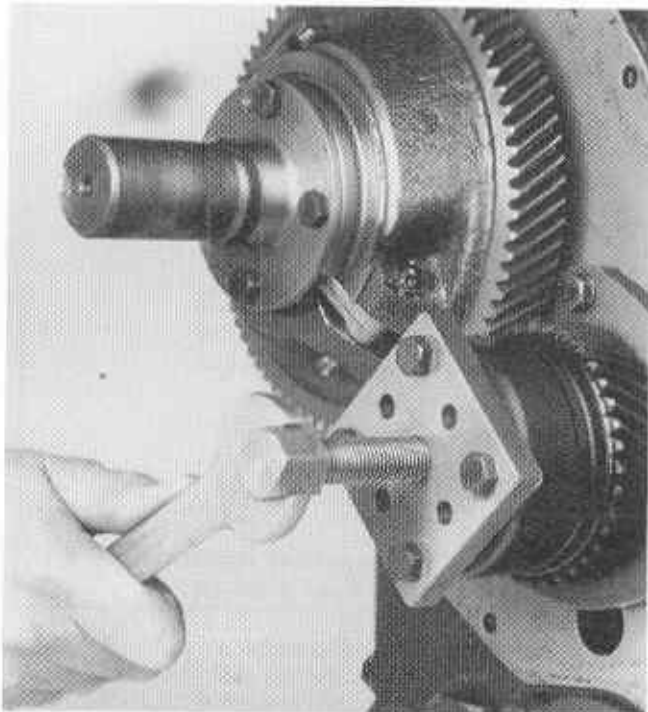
Withdrawing the Gearwheel using an Extractor
